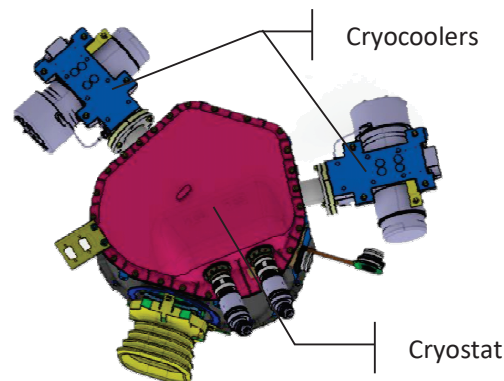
3D view of the Cryostat EM assembly including cryocoolers
